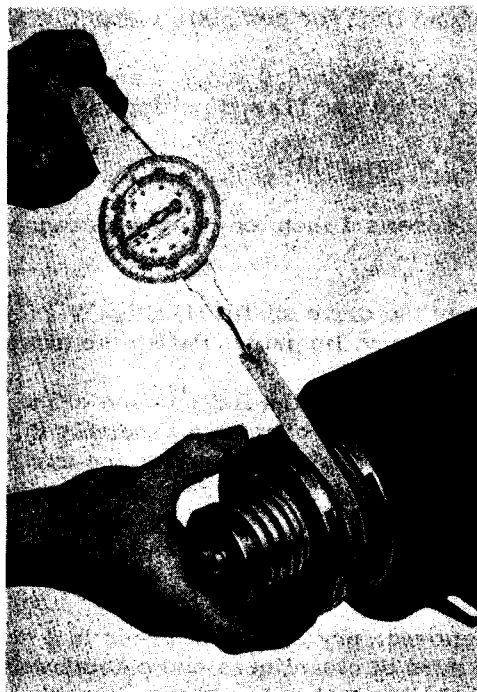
CLUTCH PRELIMINARY ADJUSTMENT WITH SPRING SCALE
